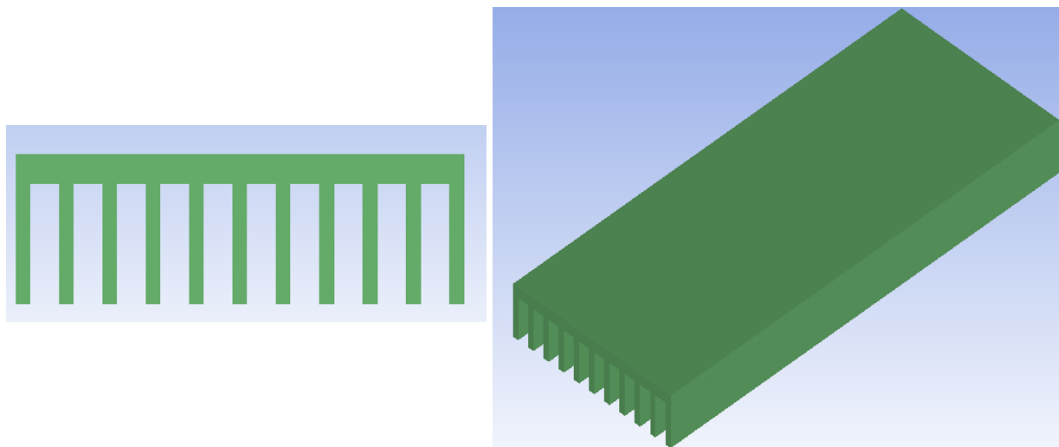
Front view of Icepak heat sink model (left) and isometric view (right)
